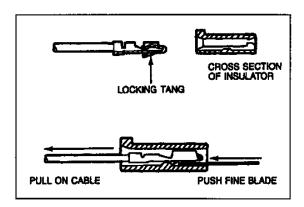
Insert Screwdriver Between Terminal's Locking Tang
